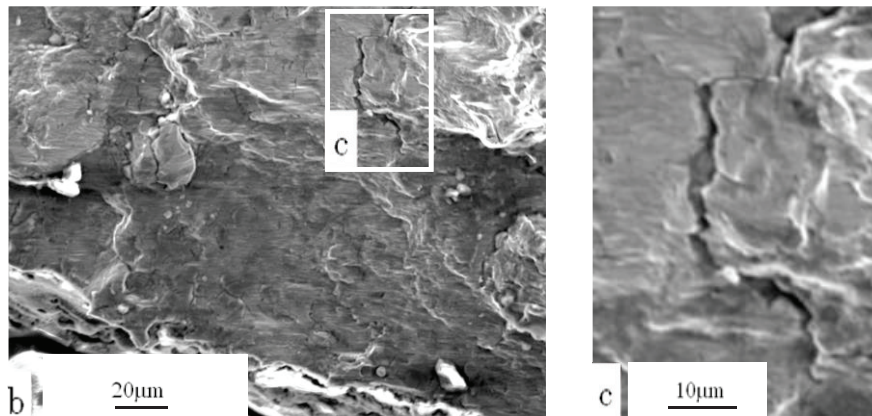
(b) Strongly abraded fracture surface (magnification of (a)); (c) magnification of (b)
